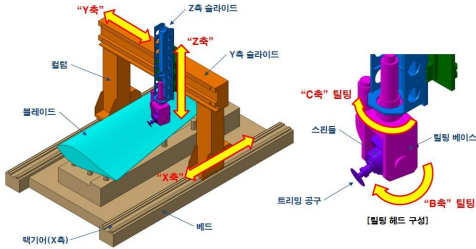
Concept model of trimming equipment and tilting type tooling head
